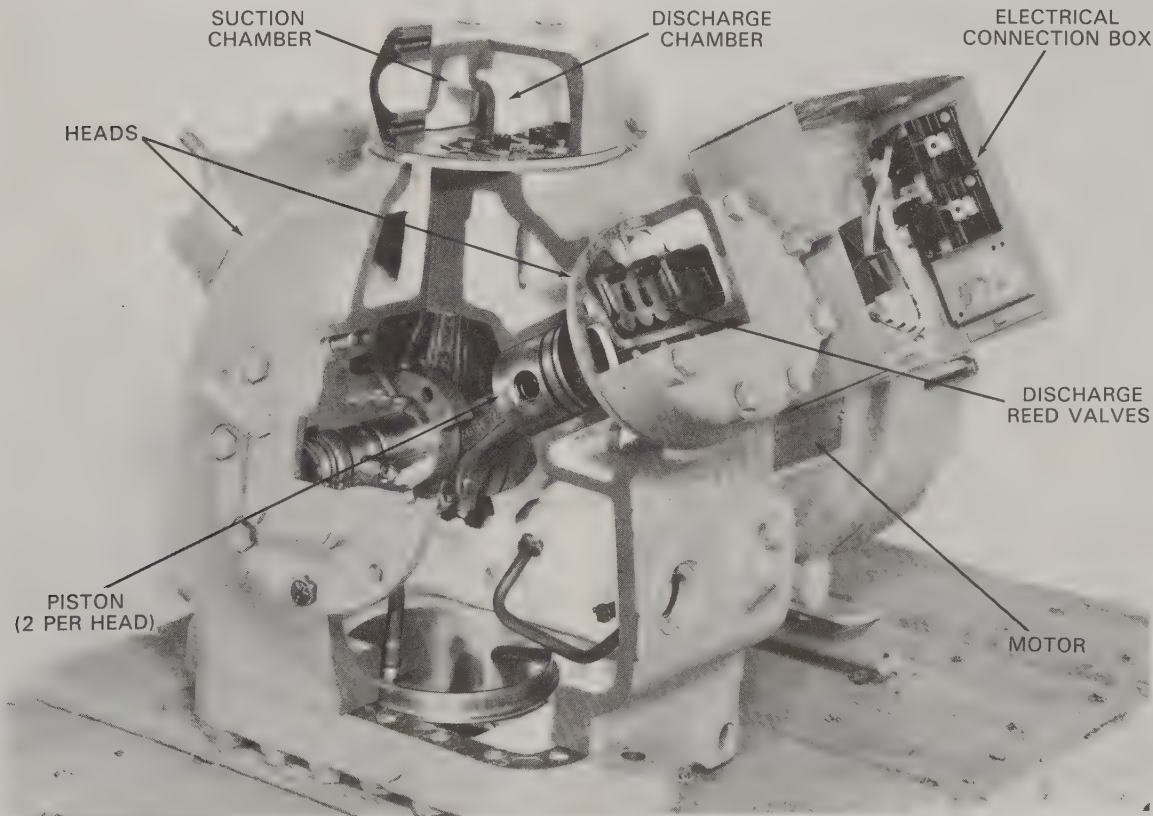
This three-head, six-cylinder compressor cutaway shows the basic construction of a semi-hermetic compressor. The motor is behind the cutaway compressor section, below the electrical connection box. (Carrier)
